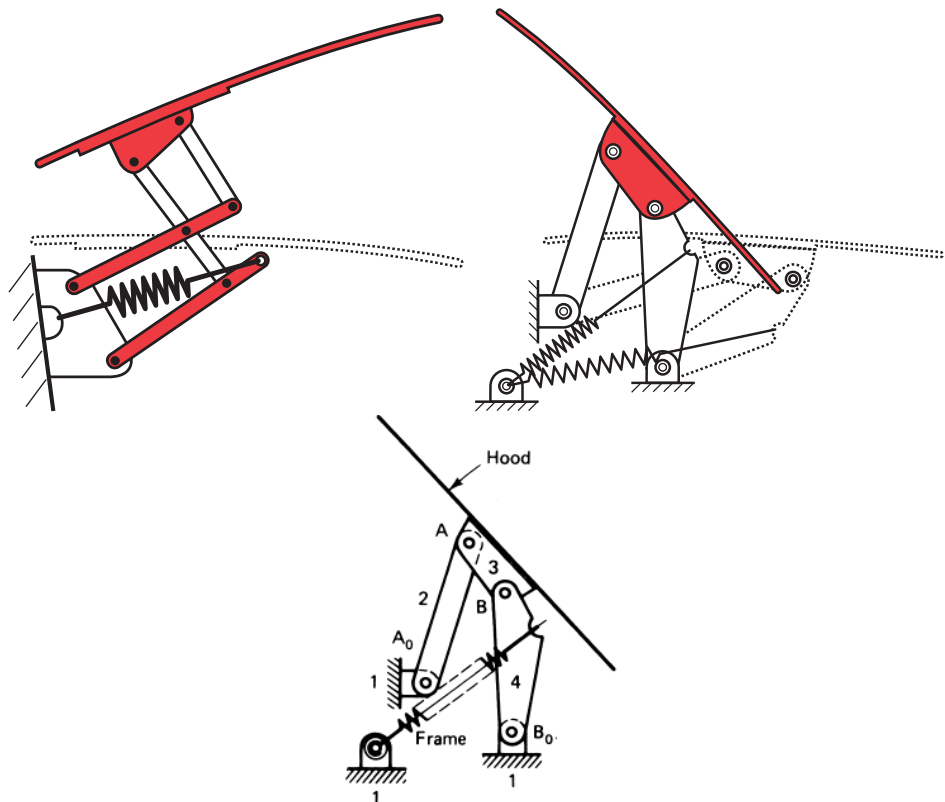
Automobile hood mechanisms as examples of a planar mechanism.
